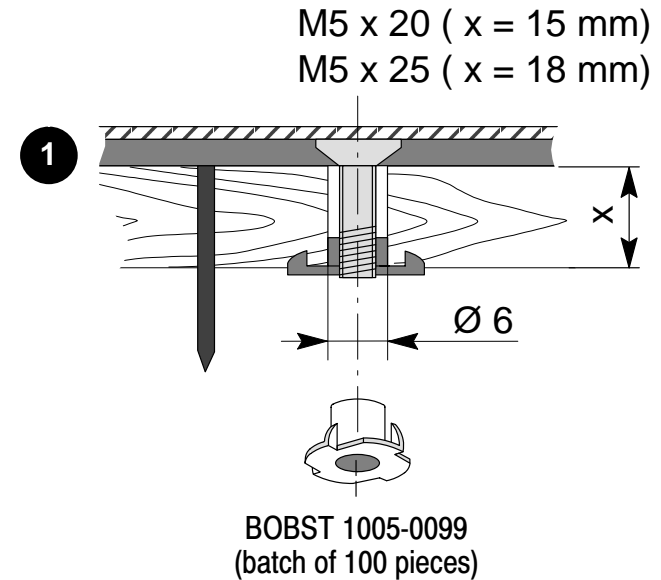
Chase with drilled bottom plate: the hole diameter is 6 mm.
